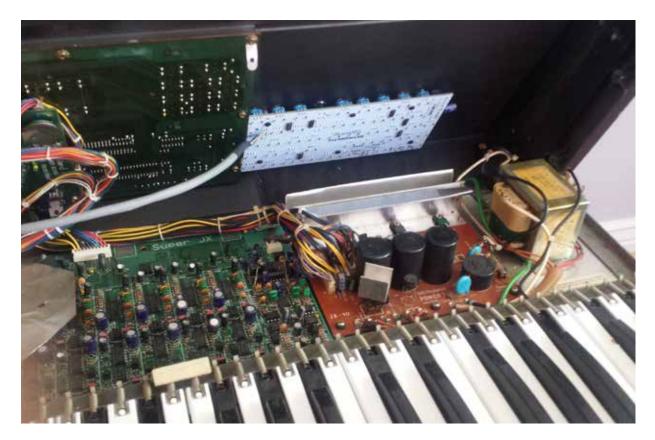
Super JX with heat sink modified. (L shape bent into fin, and rear fin trimmed by 10mm)
